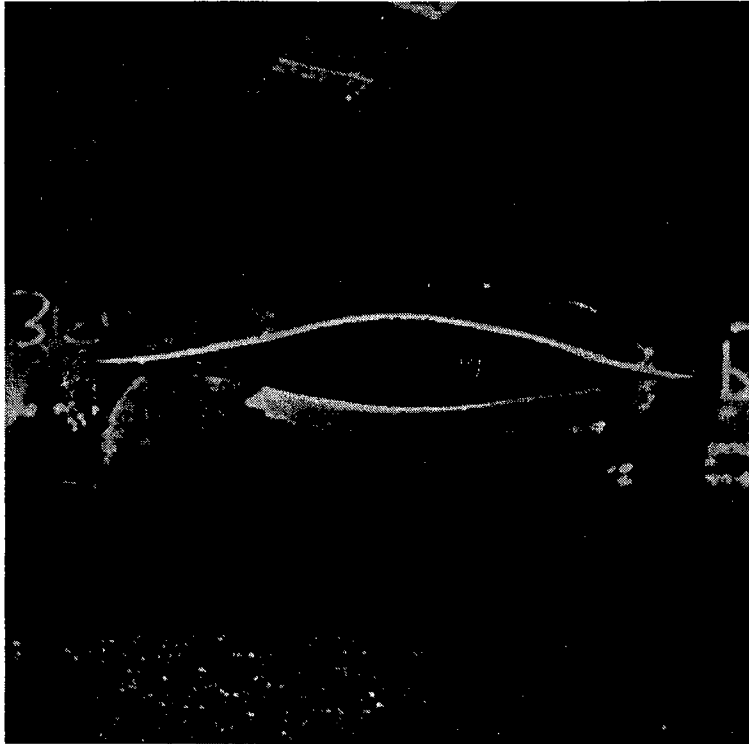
Photograph of a Typical Failure in a Burst Specimen
